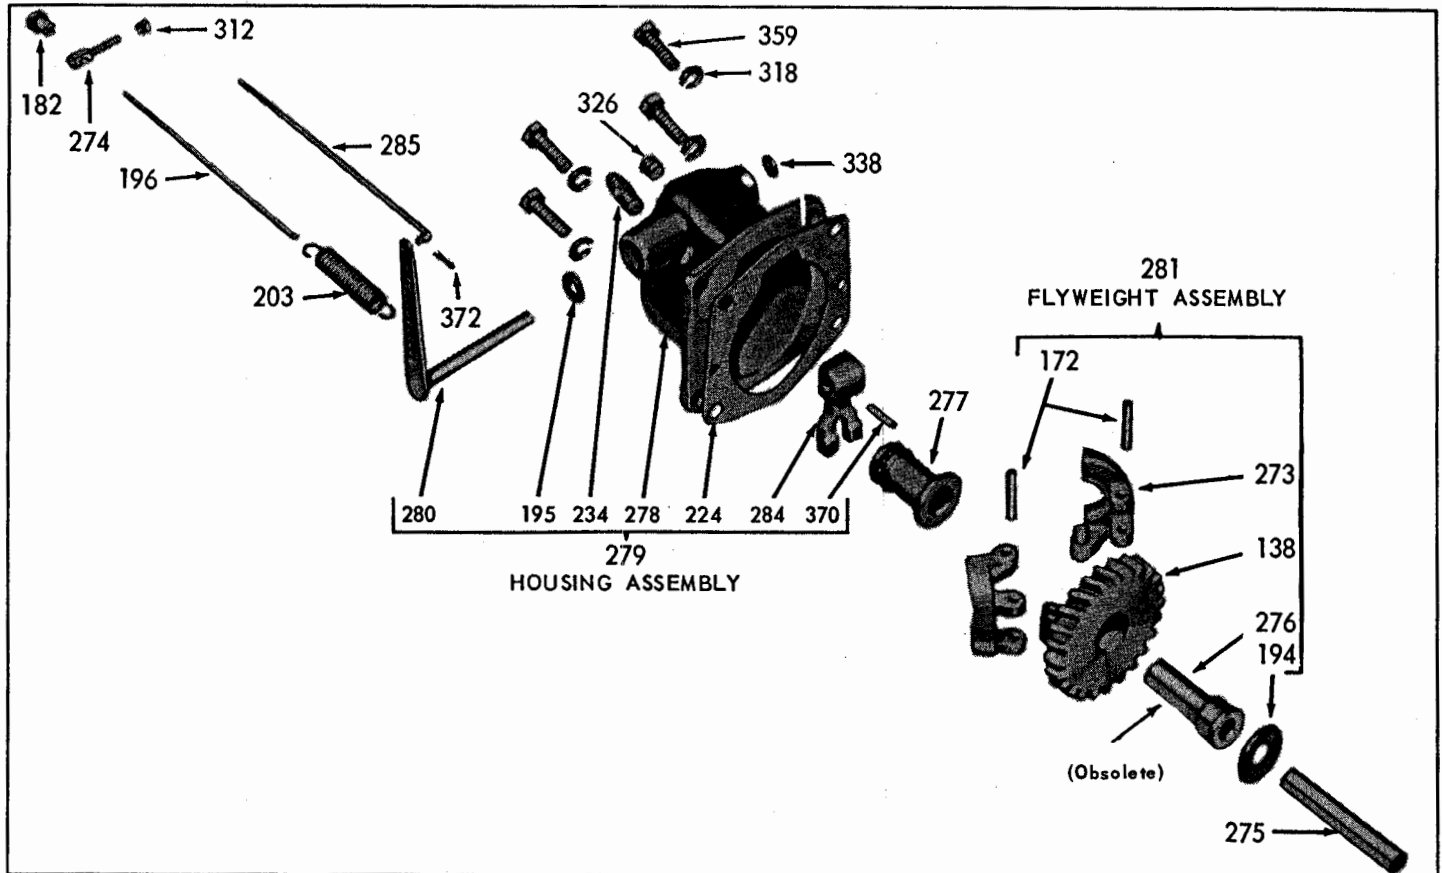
, Ref. No. 265, GOVERNOR ASSEMBLY
